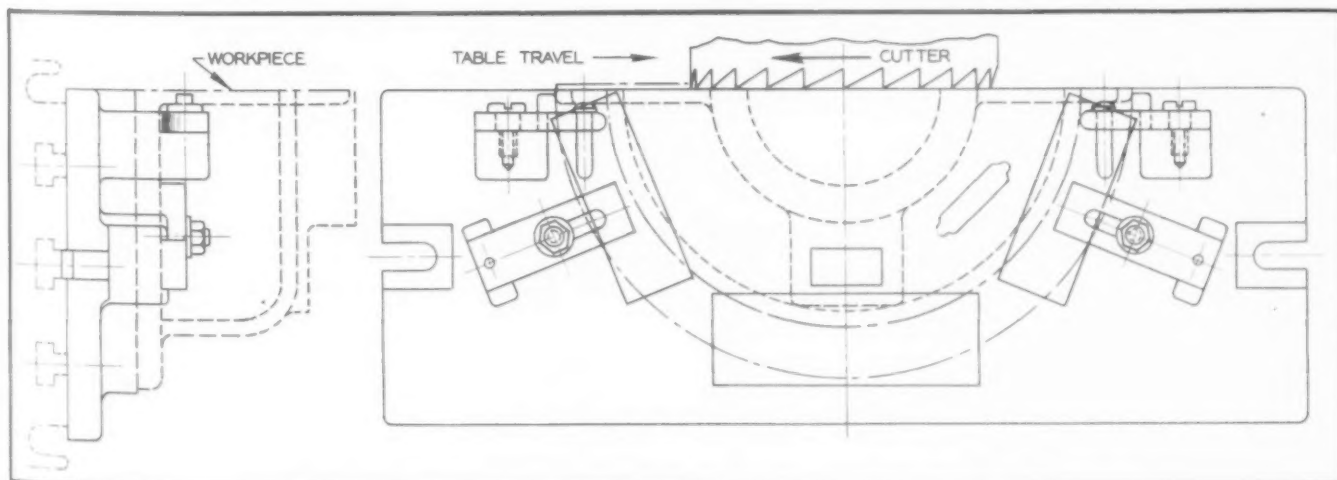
, at left, shows the part set up to mill mating flanges on a vertical miller. Fig. 2, below, shows setup for machining the flanges on a horizontal miller, as outlined in the Operation Sheet, preceding installment. While conditions may be assumed to be equal in both cases, the horizontal setup permits the part to be clamped closer to the table with the cut downward against the table, thereby reducing the chatter which is usually incidental to milling thin-walled castings. The fixtures shown are of simple construction, designed for small-lot production. For mass production, dual fixtures—shuttle, swivel or tandem with the cutter in between—would permit loading and unloading one part while the other was being milled. In either case, the fixtures should be designed to take both parts. Note the stops—swinging in the horizontal installation—for locating against the back of the flanges.
